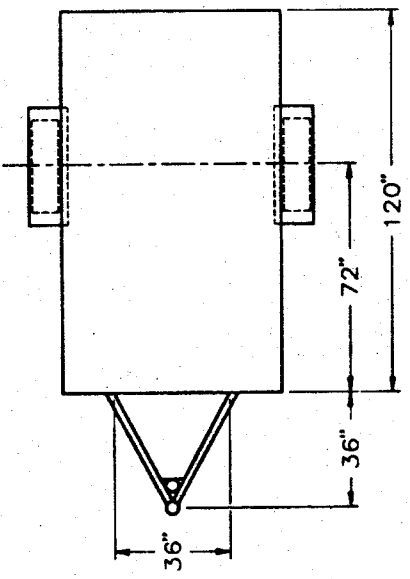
Drawing of custom designed trailer for storing and transporting testing equipment.
